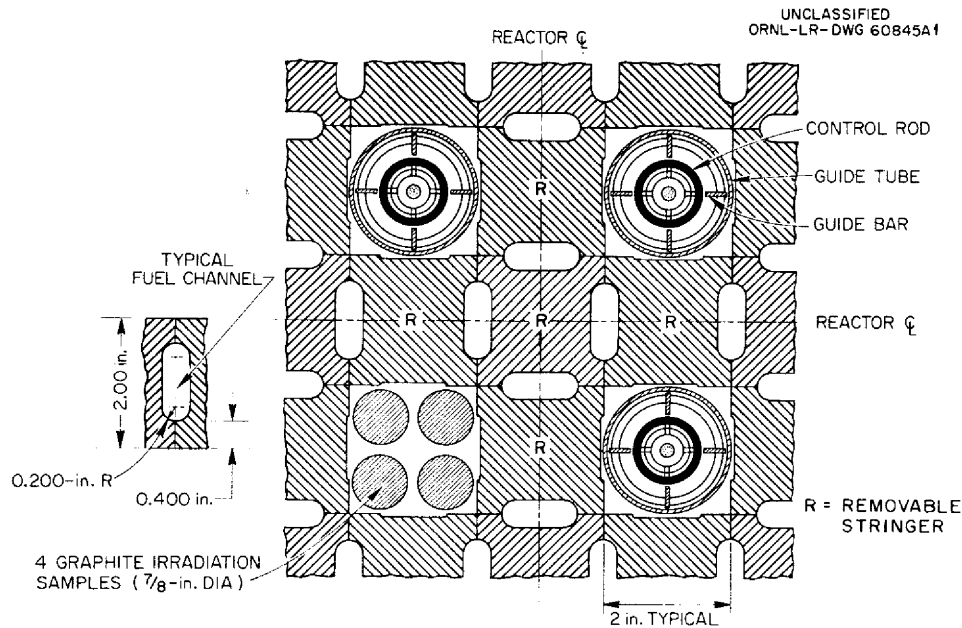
MSRE Control Rod Arrangement and Typical Fuel Channel.
